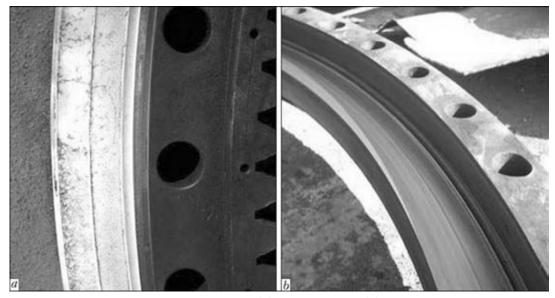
Appearance of worn-out roll surfaces of gear (a) and connection (b) rings of rotary support
